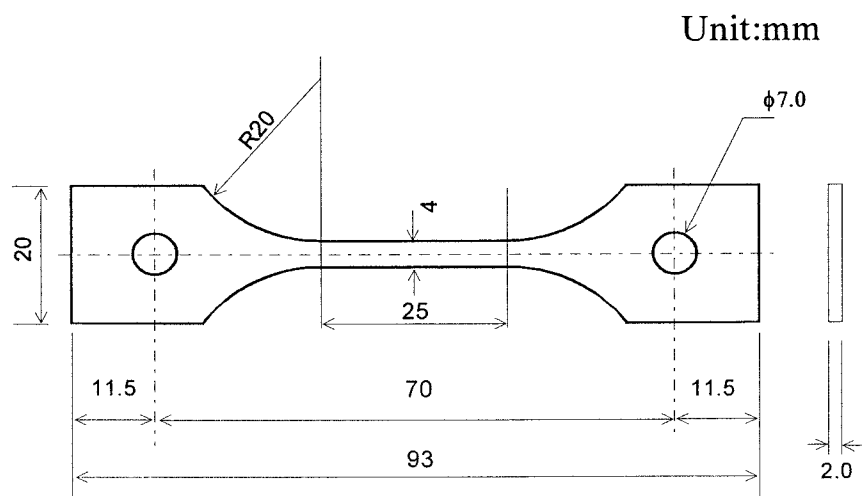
Dimension of tensile specimen for constant extension rate test.
